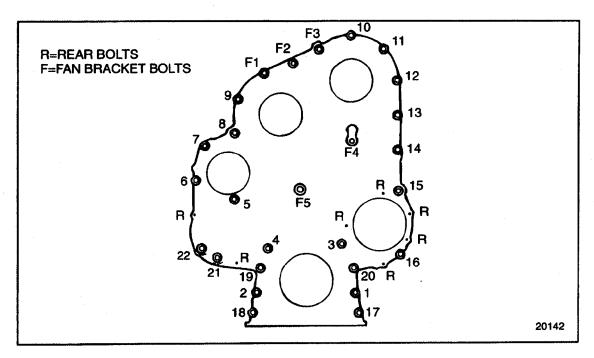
Gear Case Cover Bolt Arrangement (Front)
